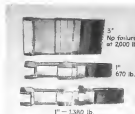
Test specimen of double sheet type type of mounting. See Table 3 for test data.
